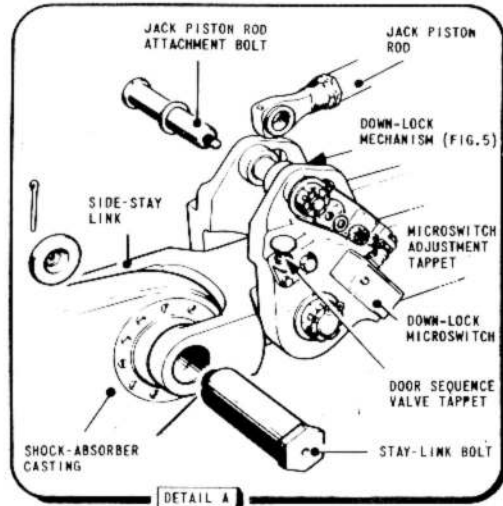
UNDERCARRIAGE REMOVAL AND ASSEMBLY
